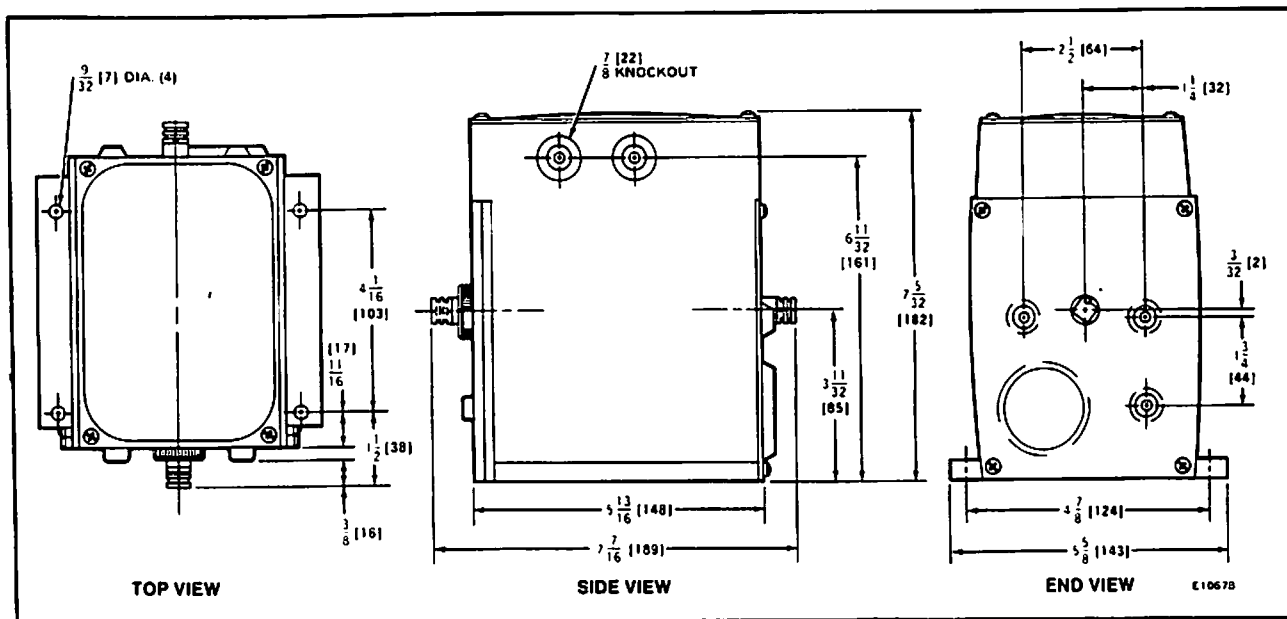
APPROXIMATE DIMENSIONS OF THE M644 MODUTROL MOTOR IN in. [mm IN BRACKETS].
